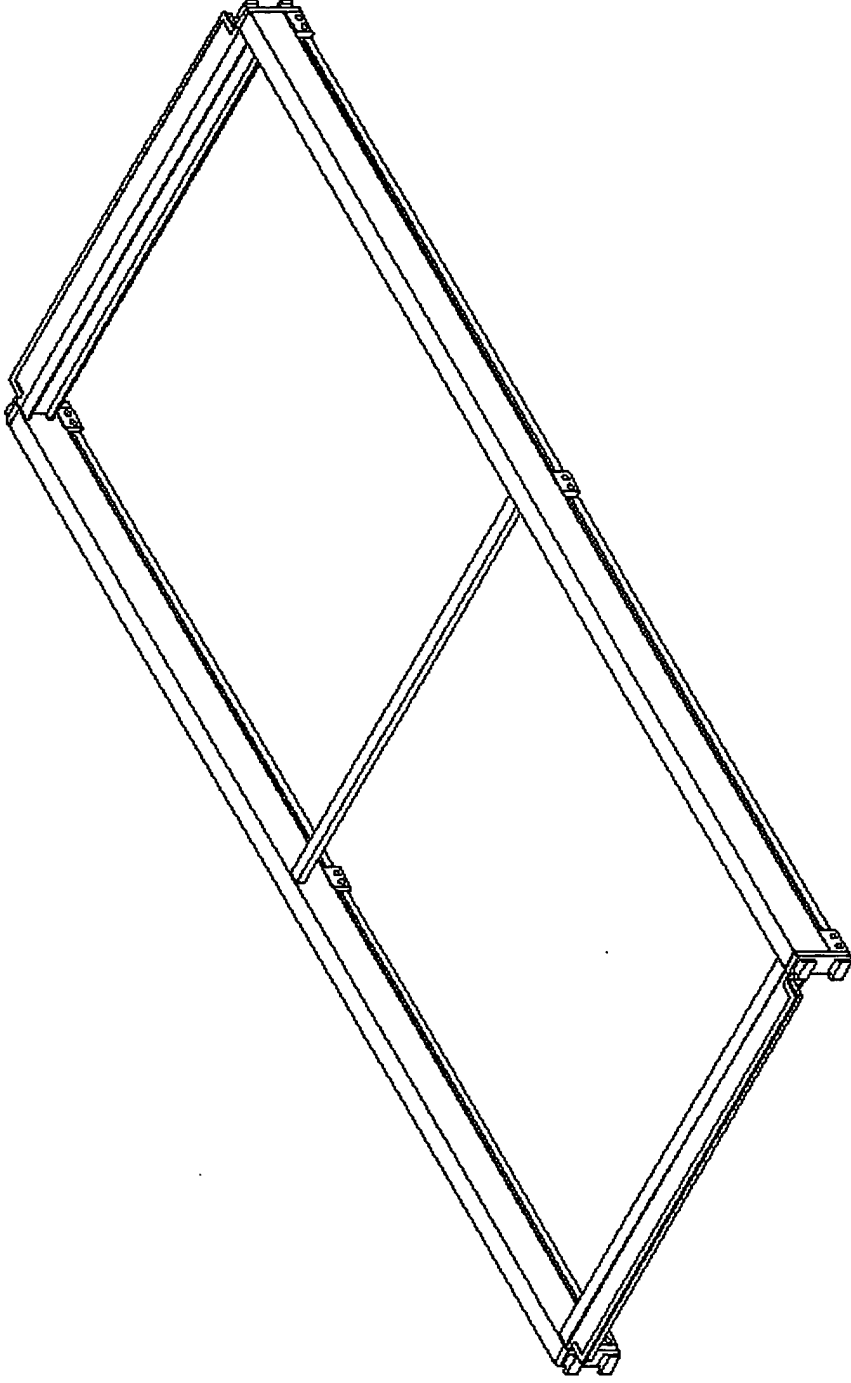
C: Isometric view of a ceiling frame (20 foot collapsible cargo container)
